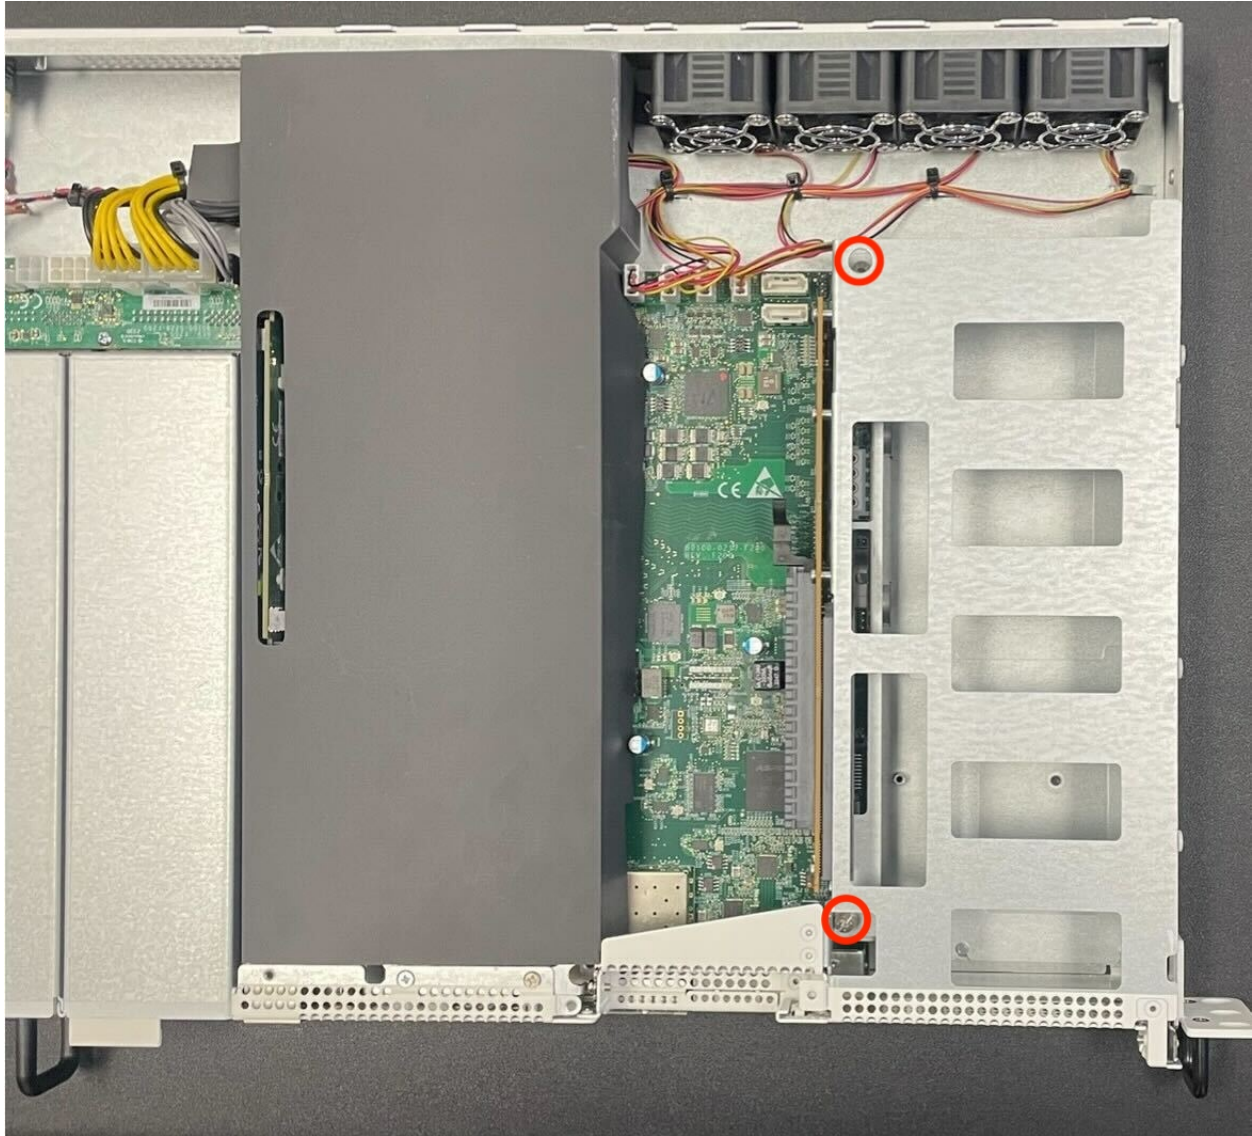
Location of the captive riser assembly retaining screws indicated with red circles
